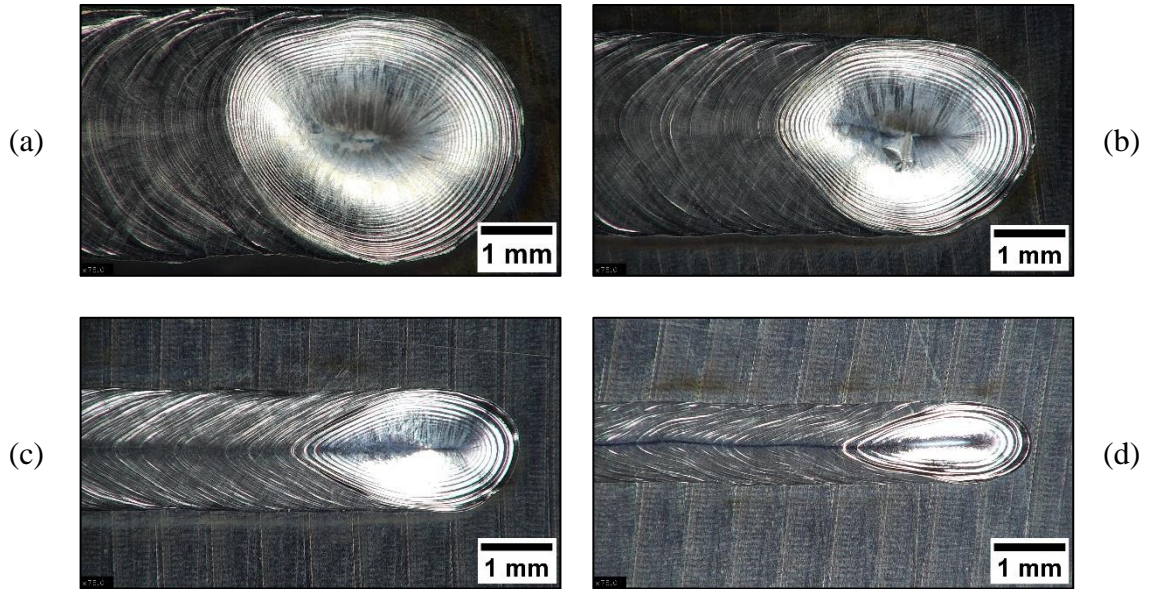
304L laser weld surfaces at 2000 W and travel speeds of 50 mm/s (a), 75 mm/s (b), 100 mm/s (c), and 150 mm/s (d).
